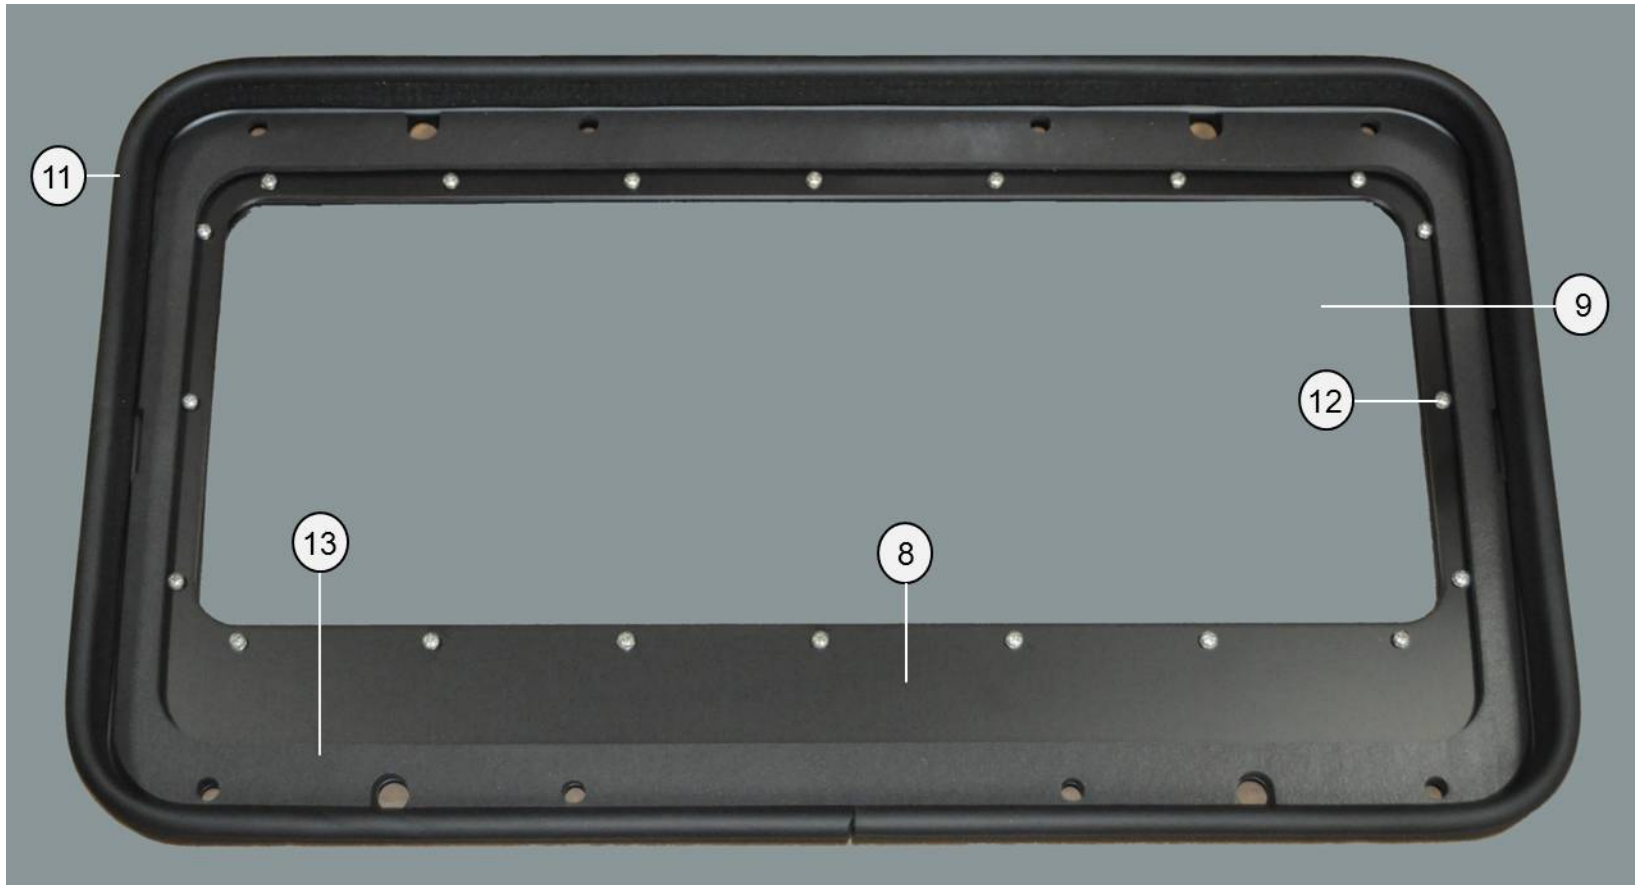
Hybrid Rear Sign Cover, Inside View
